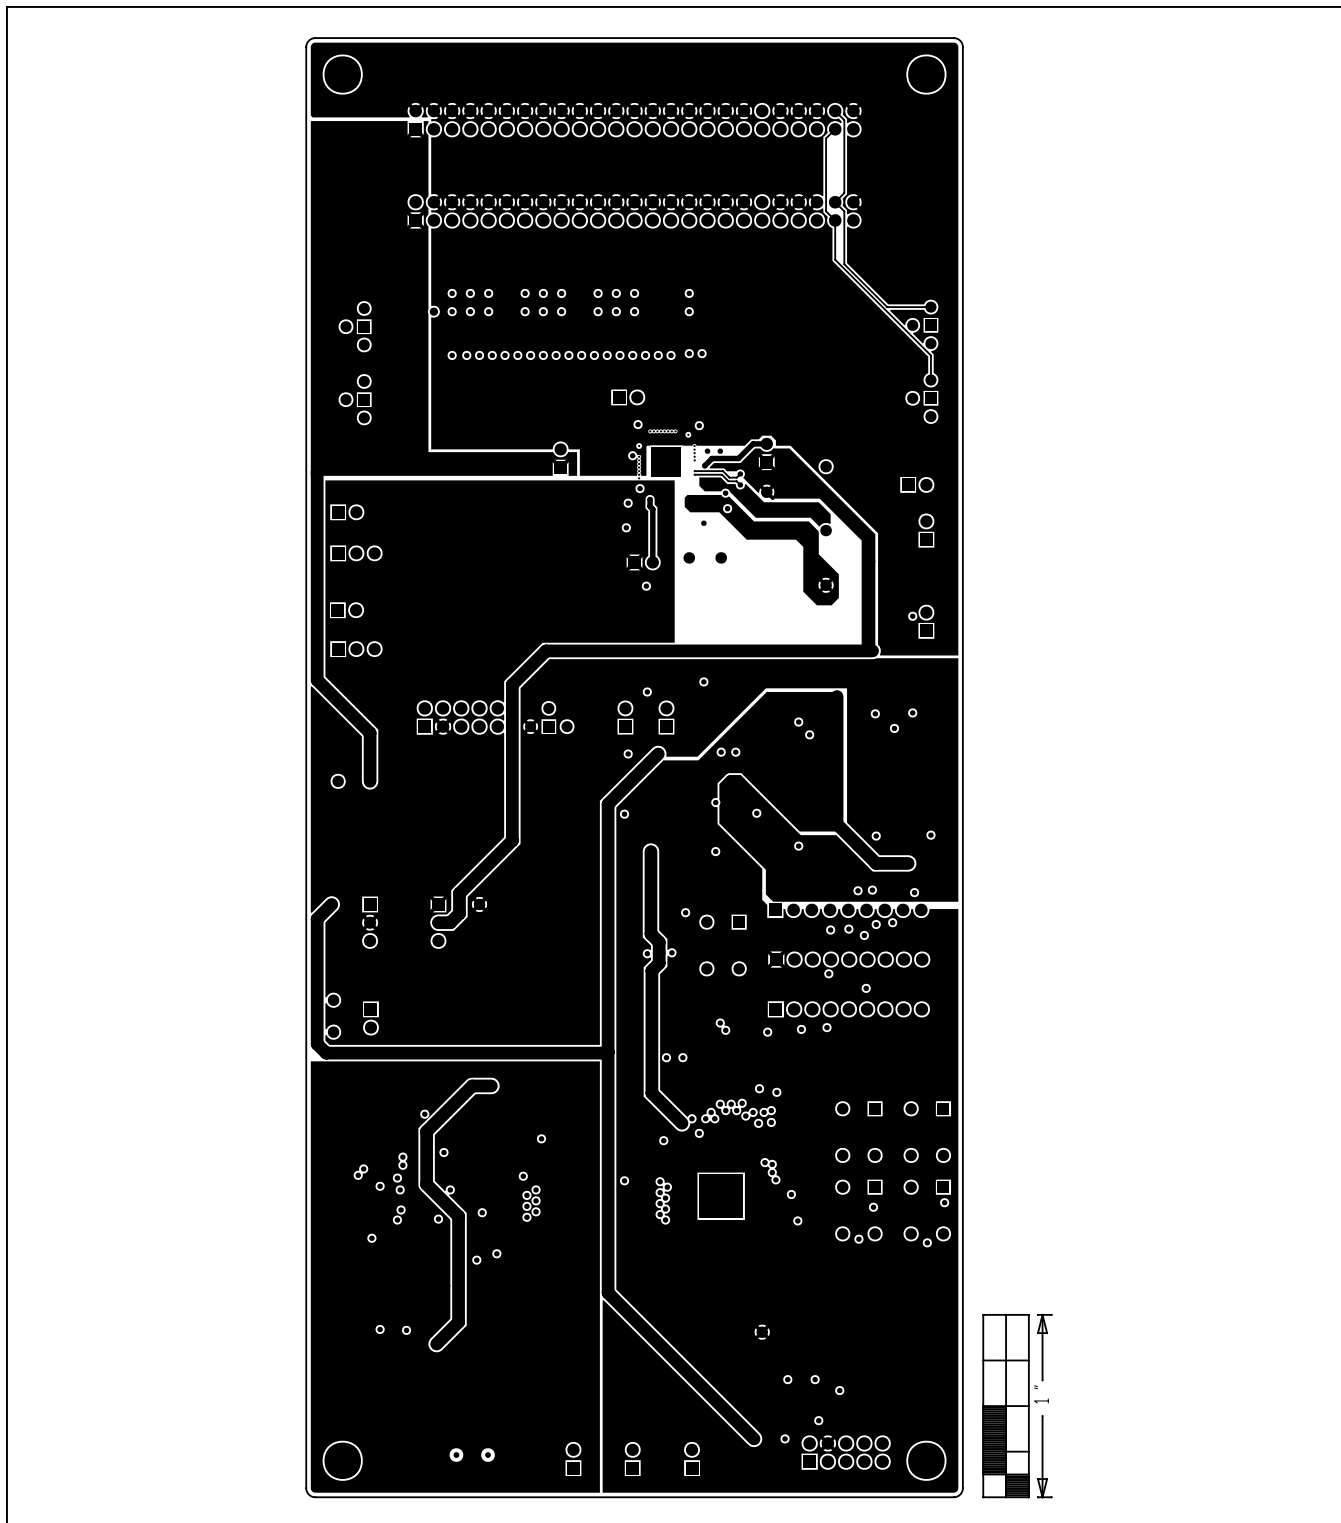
MAX11301 EV Kit PCB Layout—Power Layer 3
